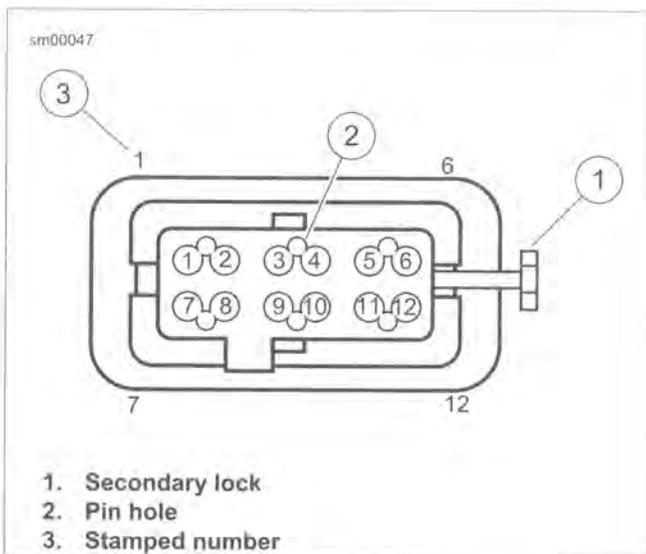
Delphi Micro-64 Sealed Connector: Housing
